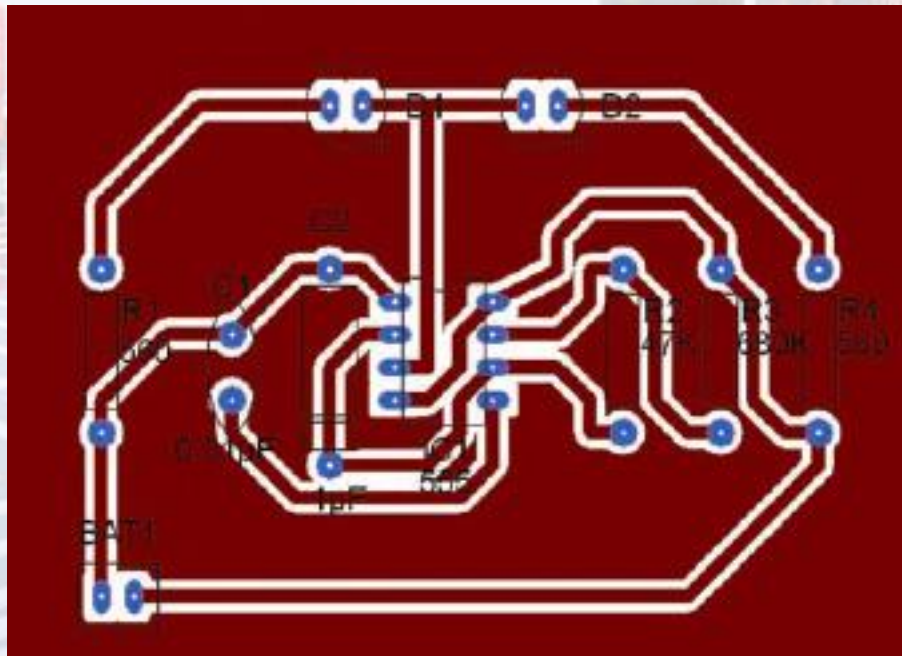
X-ray view of a printed circuit board layout from the component side.
